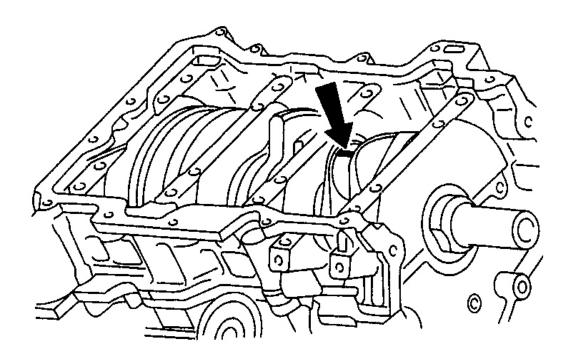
Measuring Connecting Rod Oil Clearance Courtesy of MAZDA MOTORS CORP.
